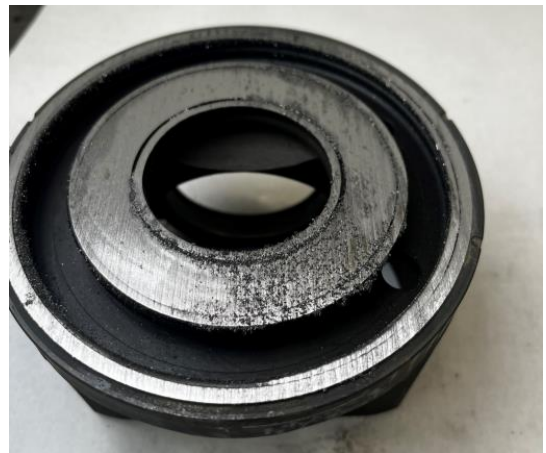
Cross sectional view of piston 12 top part of cooling gallery after cleaning.
